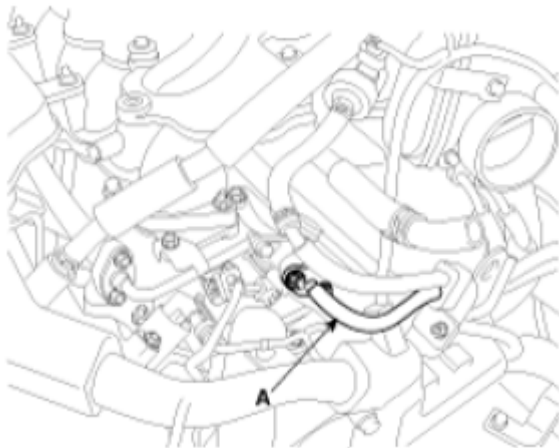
Identifying Fuel Inlet Hose From Delivery Pipe
